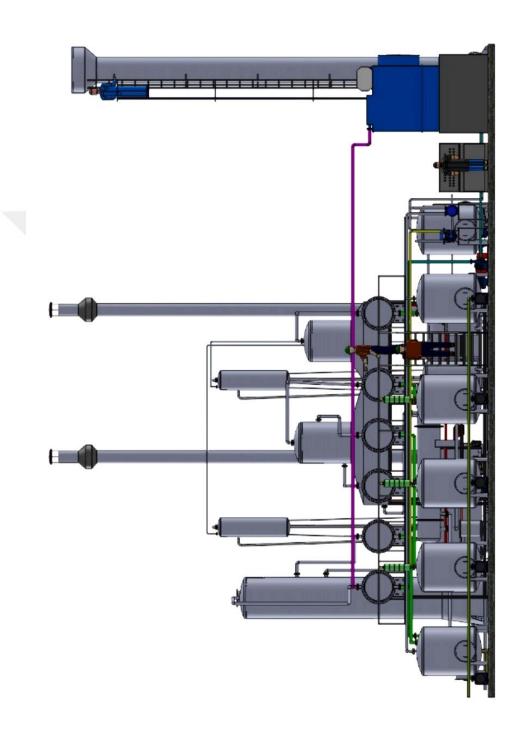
3D design of the lube oil recycling unit (side view:3)
